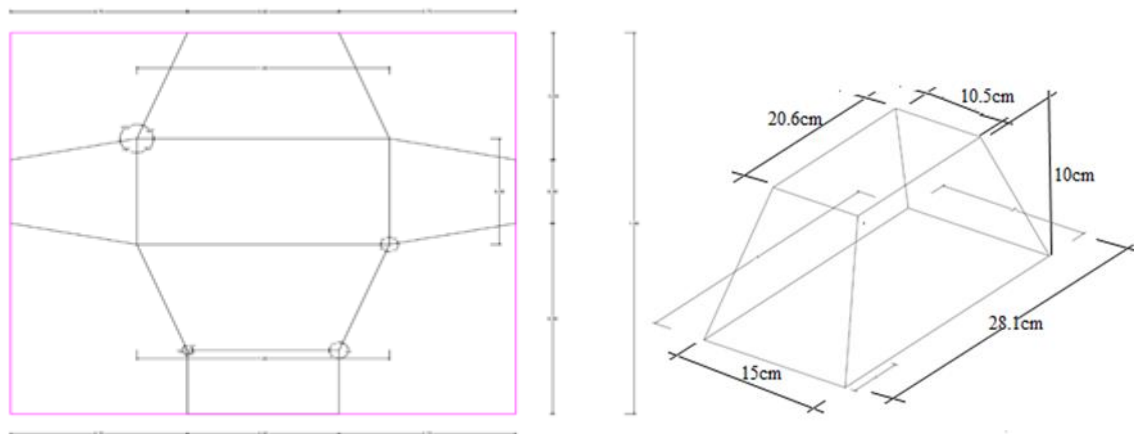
(Left) Geometric design of the Tarp digester , (Right): Perspective view
